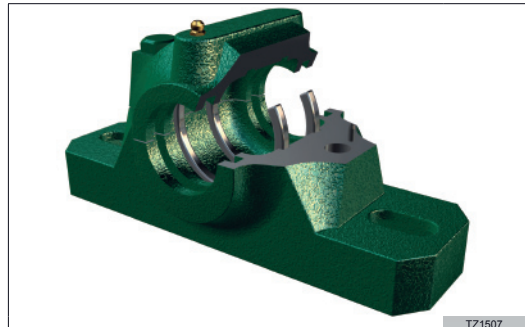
Solid “standing” bearing housing for self-aligning ball bearings and spherical roller bearings of SN-type.
